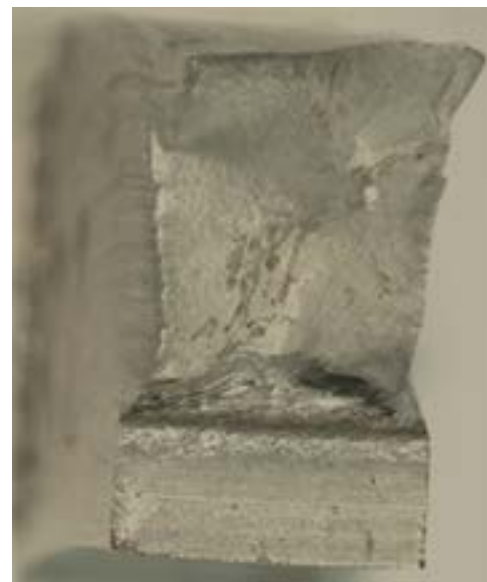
Fractography of the joint in specimen no. 4 after the static tensile tests
